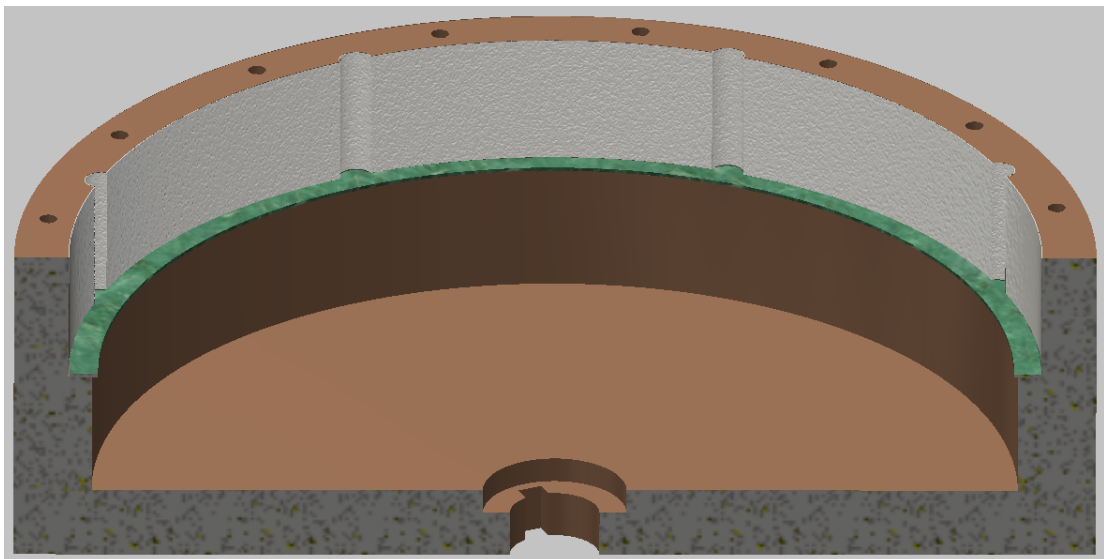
Rotor drum with insulating transformer paper and FR4 ring. Machine dimensions as described in Appendix B.
